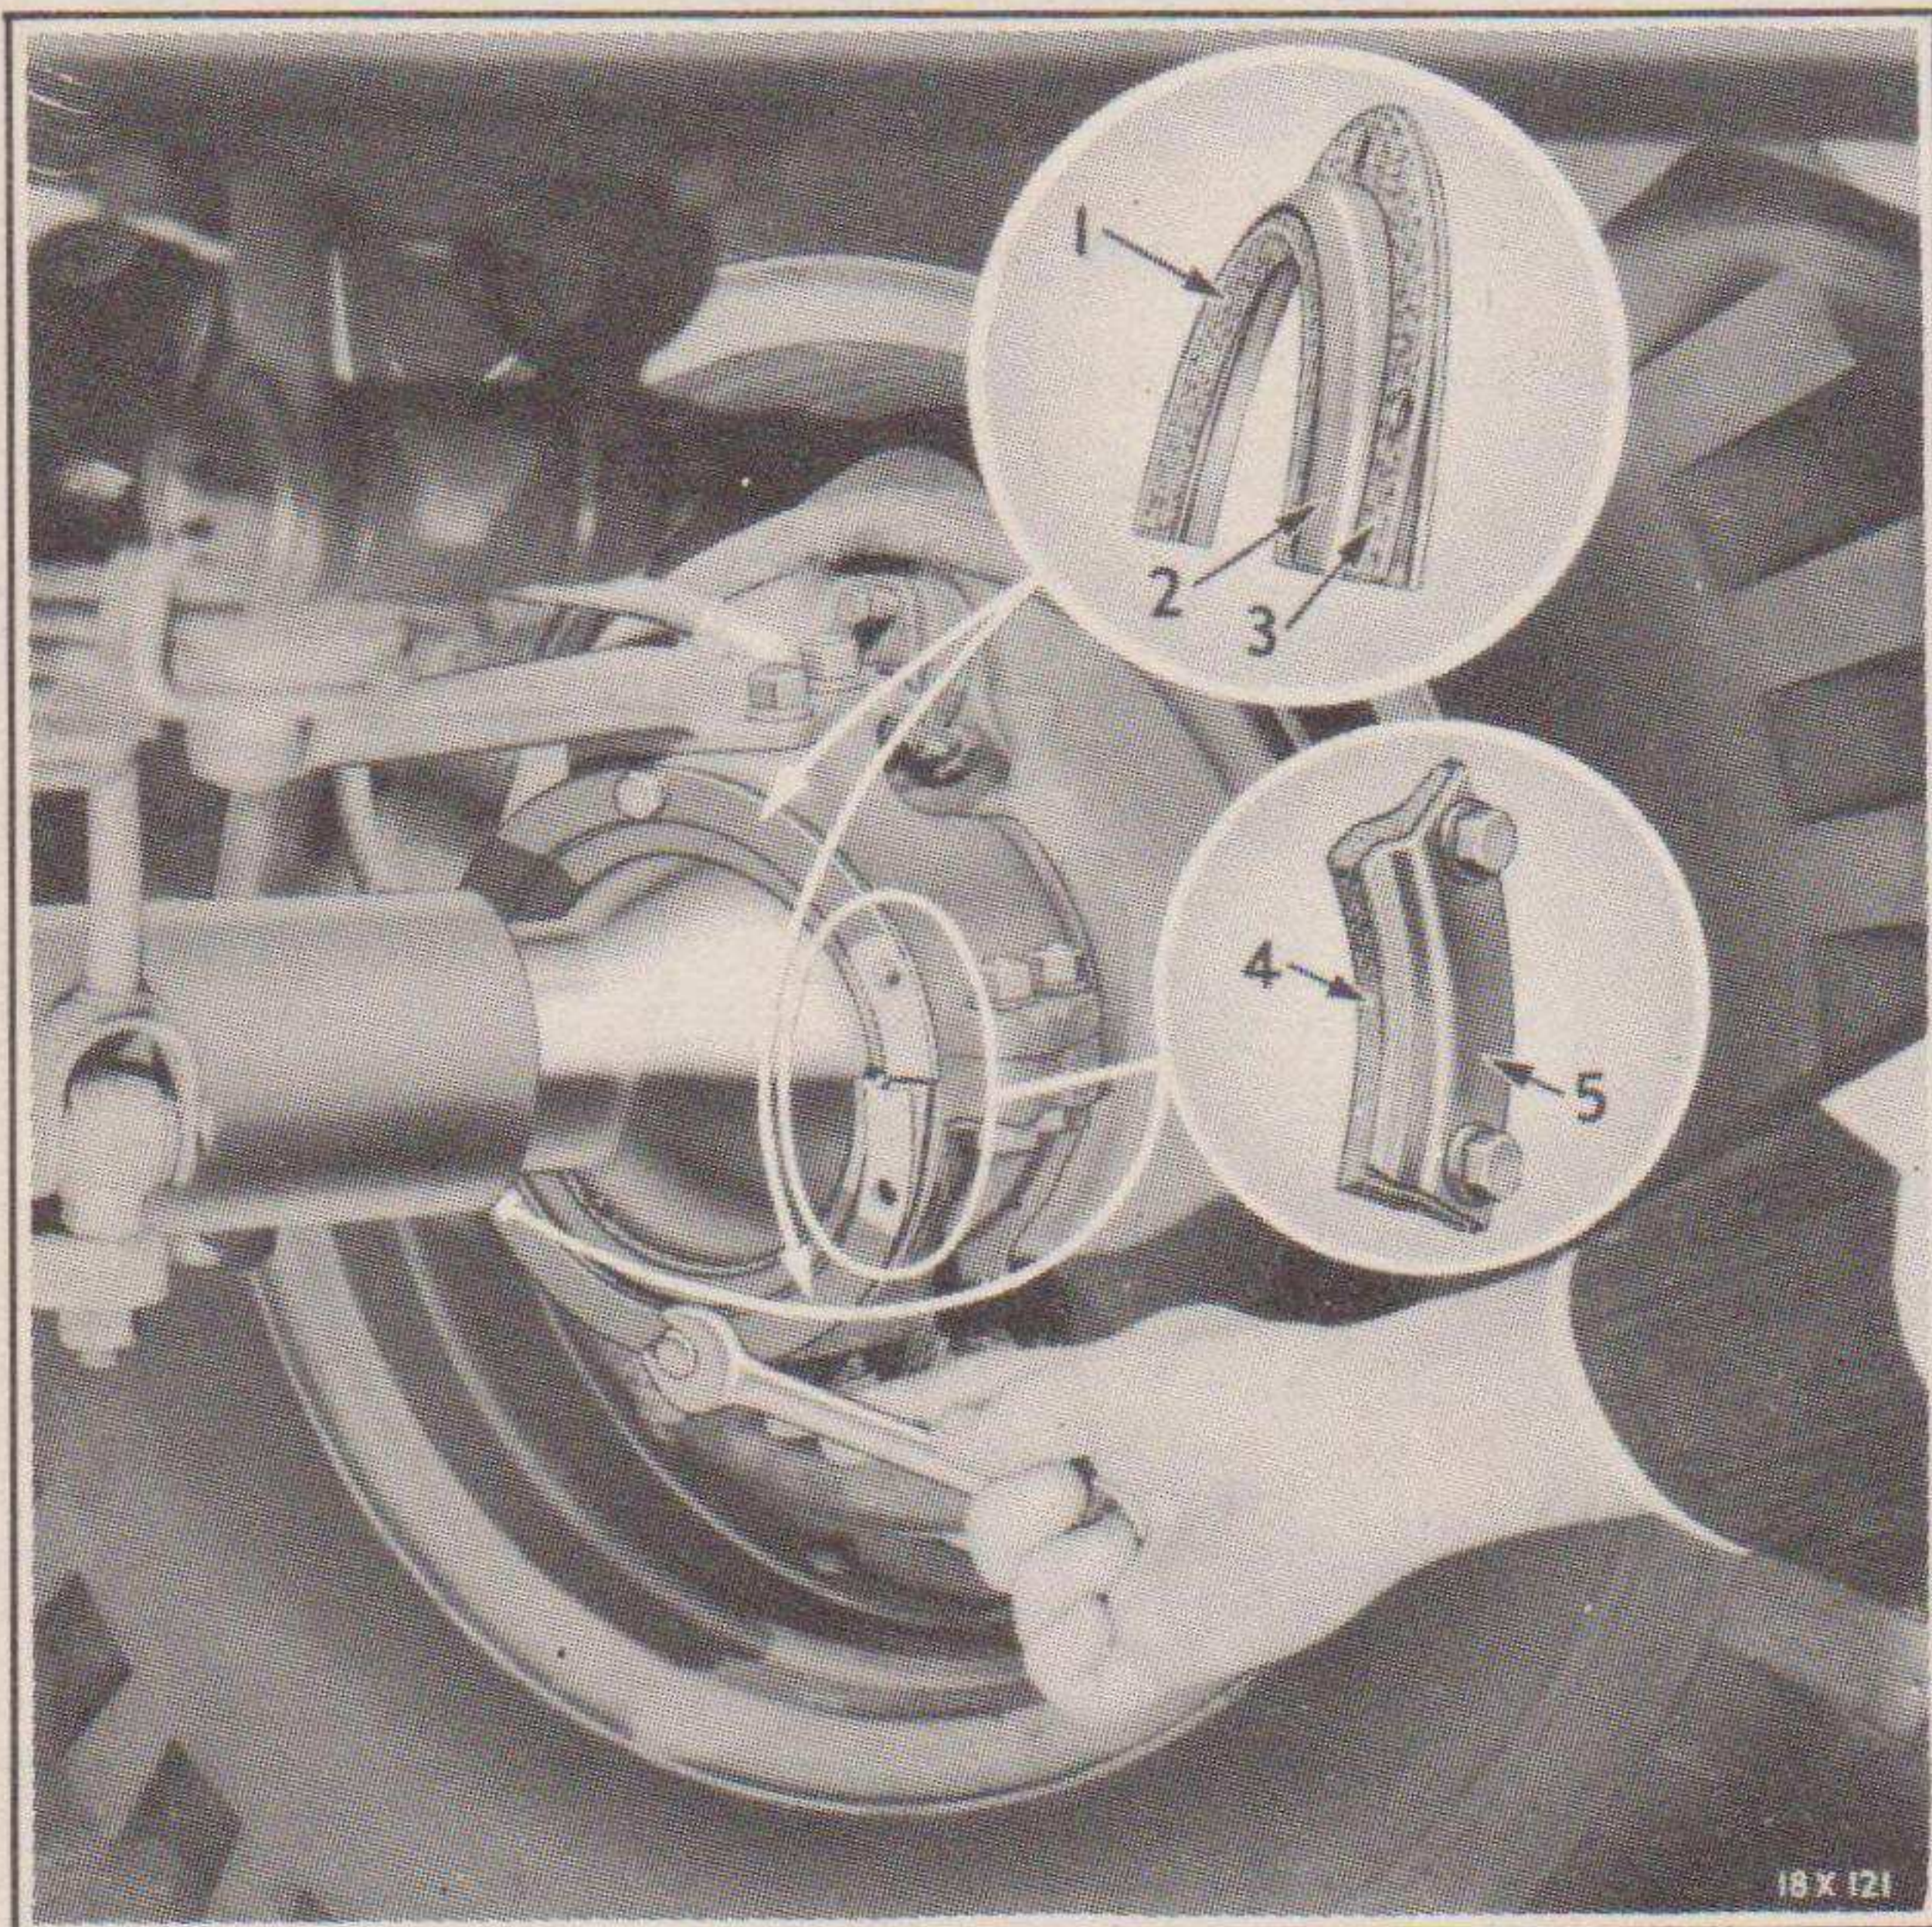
Removing Steering Knuckle Flange Oil Seals
